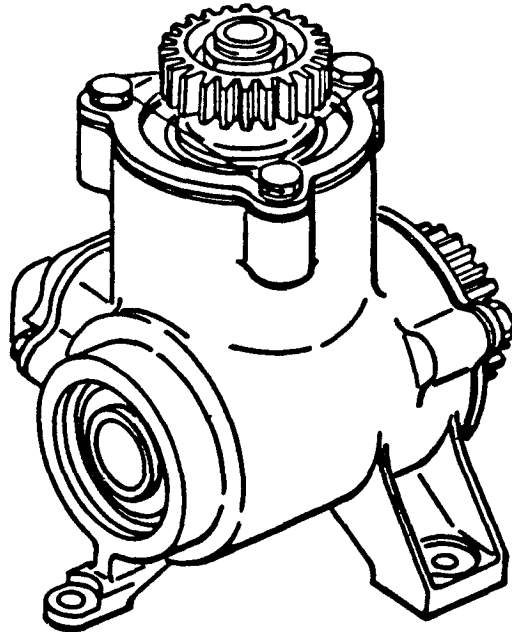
Trailing Edge Flap Right Angle Gearbox Assembly
